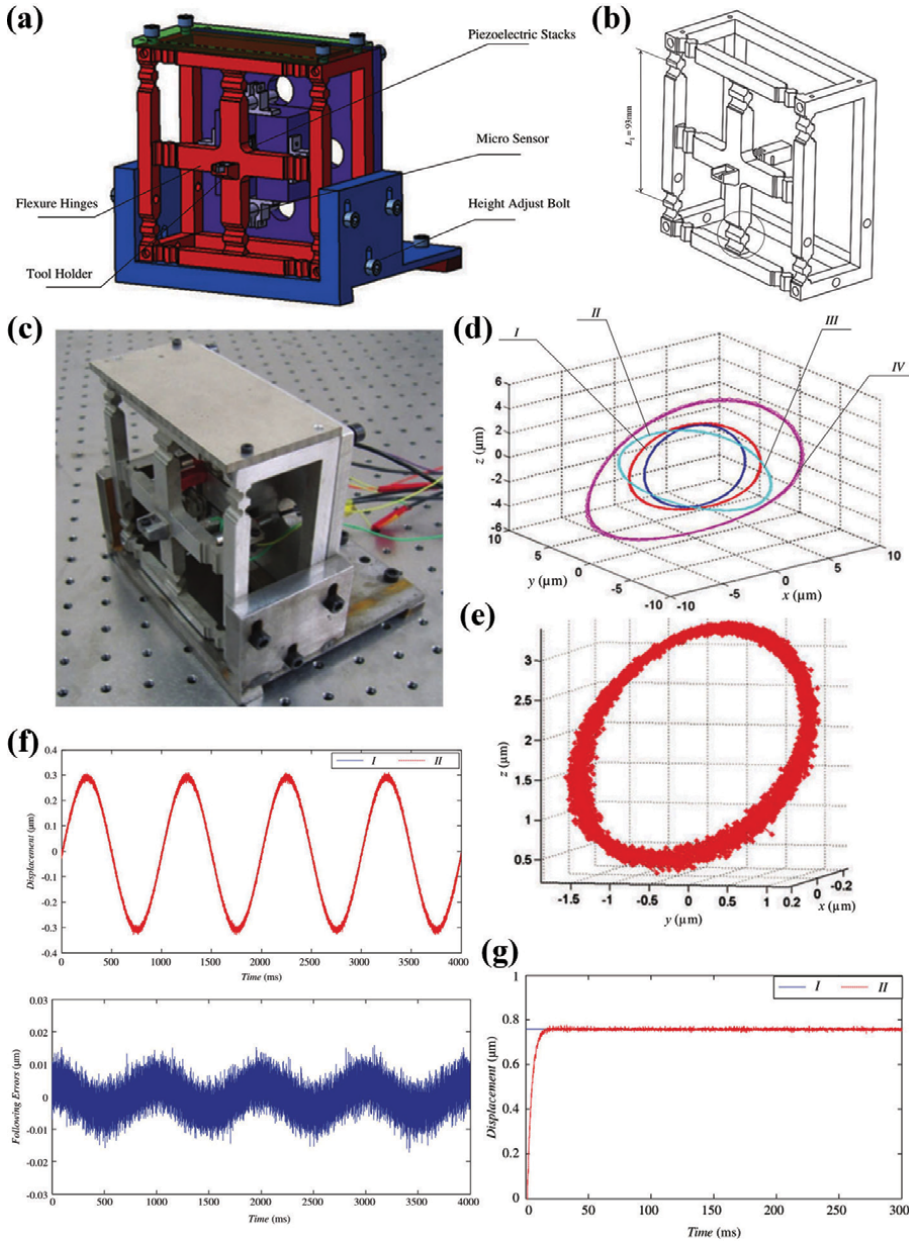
Illustration of 3D model, prototype and testing results. (a) 3D model of the developed EVC vibrator. (b) Mechanical structure of compliant mechanism. (c) Fabricated prototype. (d) Simulated tool locus. (e) Actual tool locus. (f) Tracking performance. (g) Step response [16].
